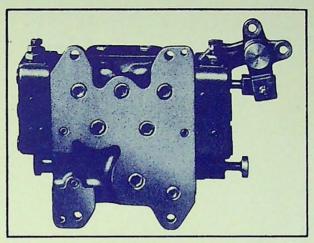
Rear View of Oilgear Size 1 Combination Valve.
